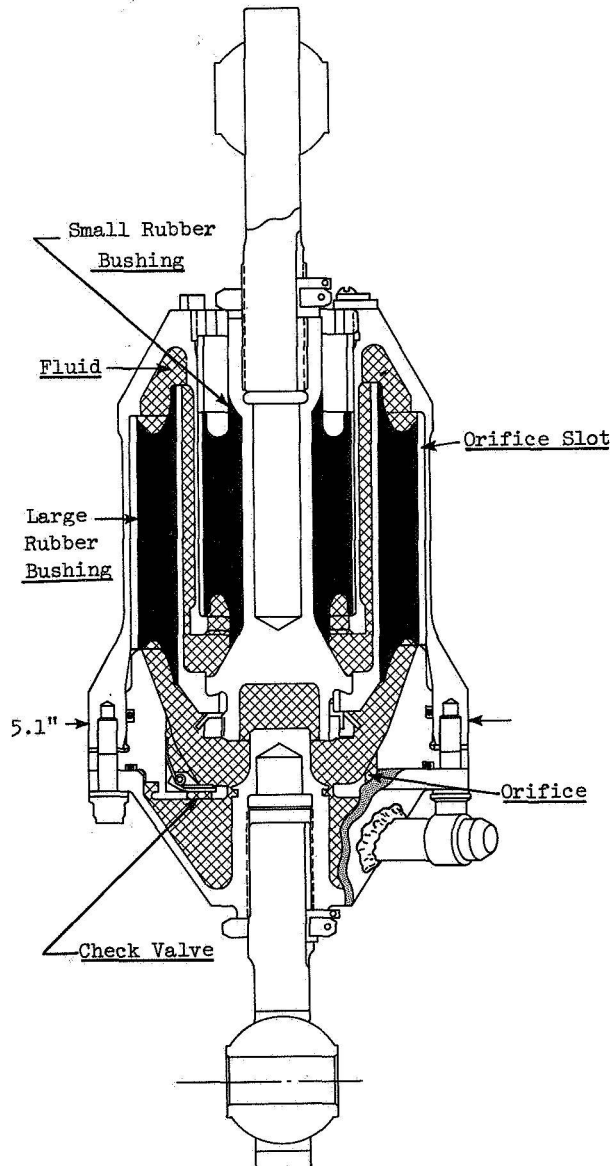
Stall-Flutter Spring-Damper Pushrod Assembly.
